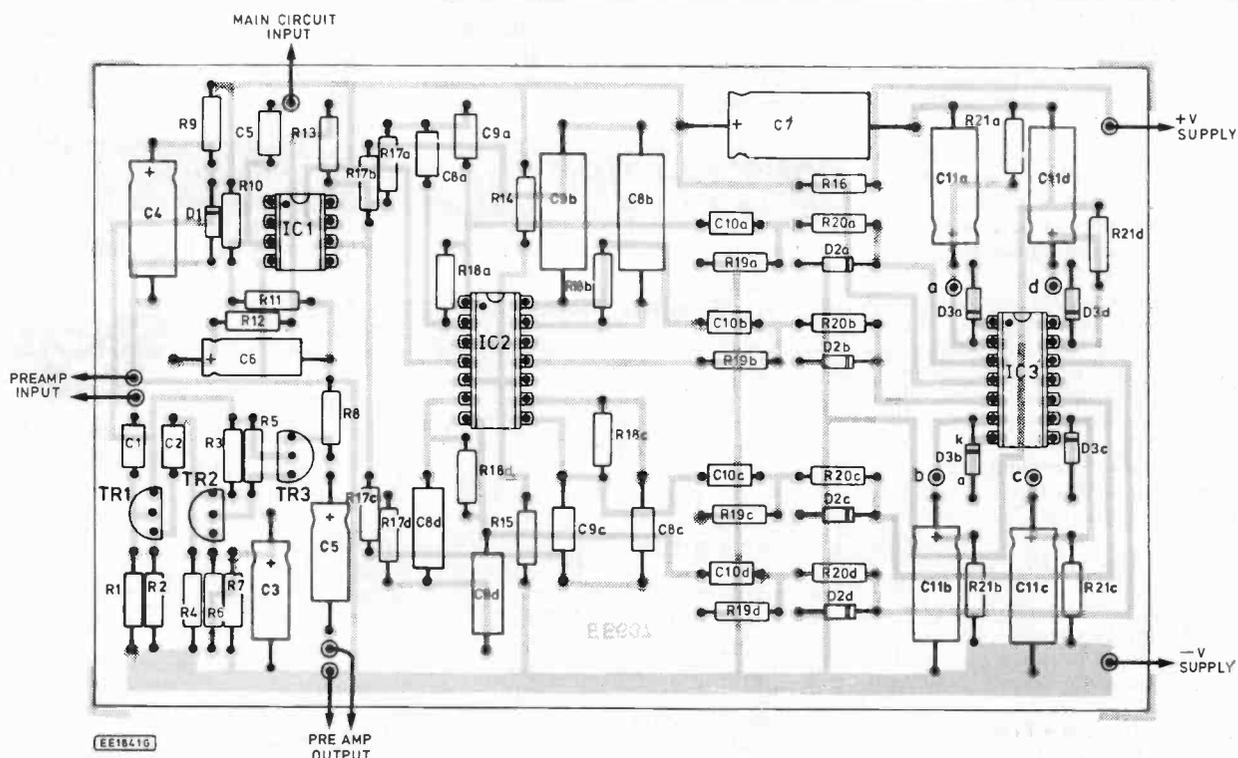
Printed circuit board component layout and full size copper foil master pattern.
